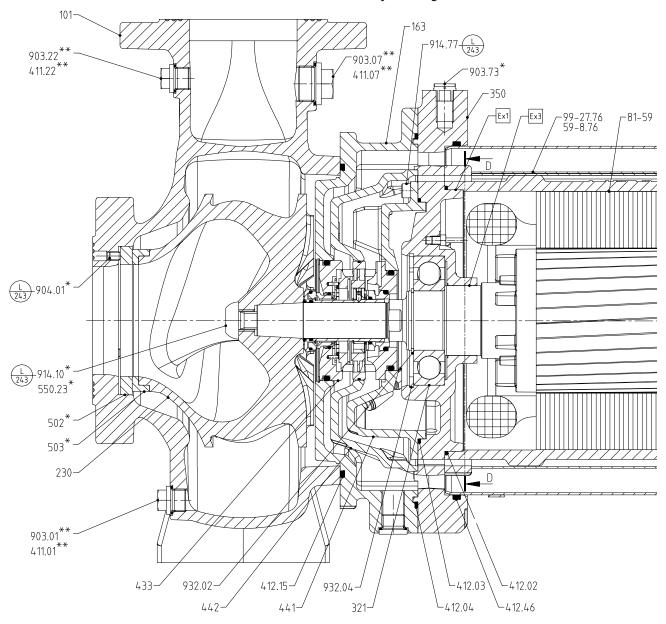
General assembly drawing of Amarex KRT, part 1 of 2
